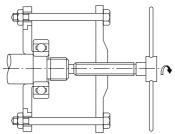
Removal of Inner Ring Using Withdrawal Tool (1)
